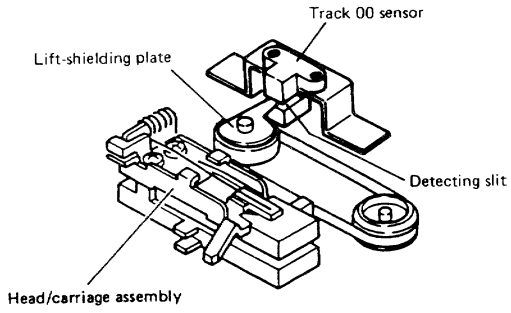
Track 00 Sensor and Head/Carriage Assembly
